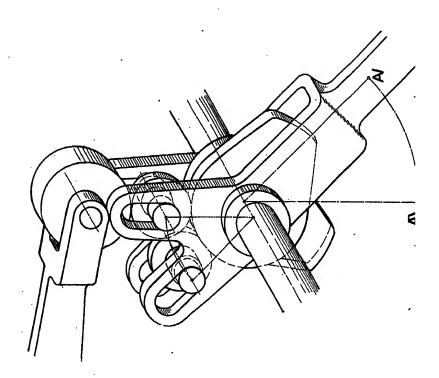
represents the general arrangement of the reversing gear of the Werkspoor engine of the motor ship "Vulcanus." There are two cam shafts a for ahead and i for astern running. The supports for these shafts are connected by angled brackets, which have their fulcrum on the main horizontal shaft, around which they can rotate, so that the cam on the shaft a or on the shaft i acts upon the valve lever according to the direction of rotation required.
